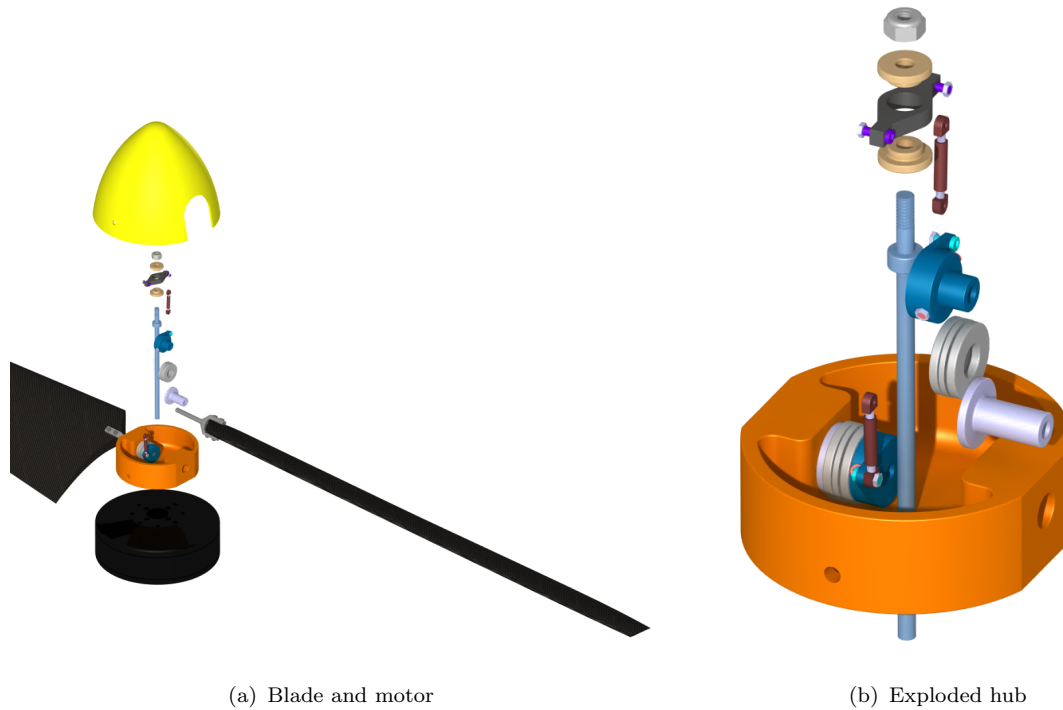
Detailed assembly of the hub design: (a) Blade and motor, (b) Exploded view.
